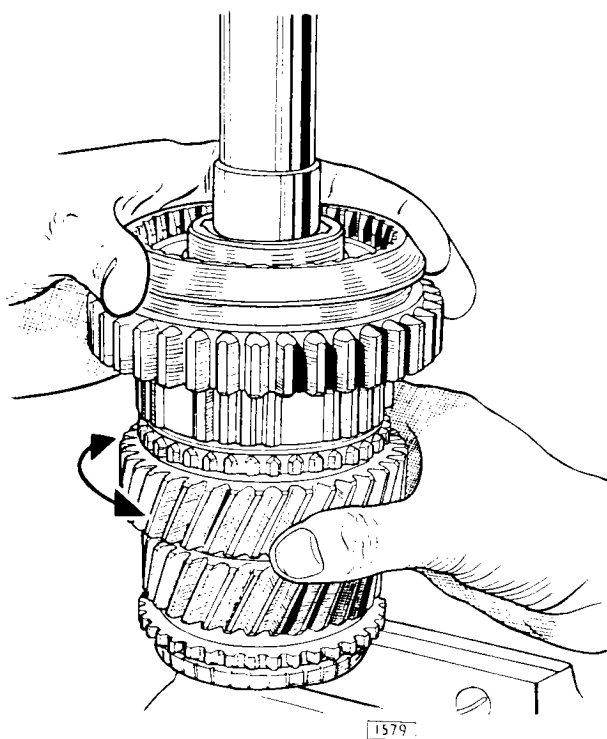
With the 1st gear engaged and slight downward pressure on the synchro assembly the 2nd gear assembly should be free to rotate
